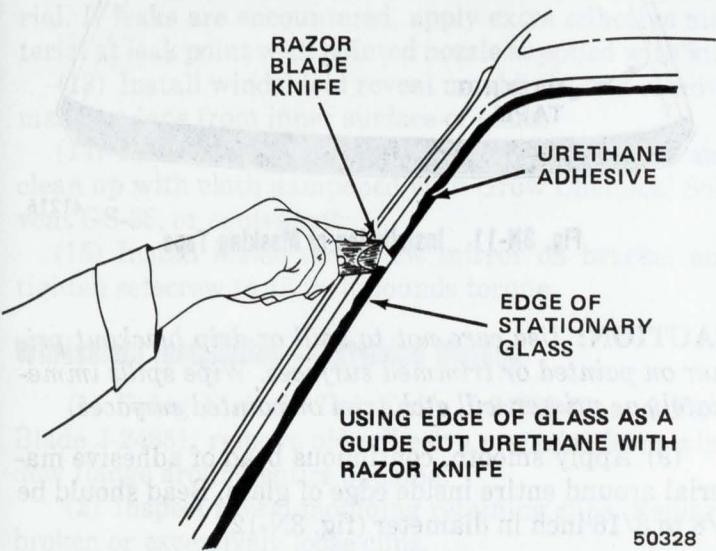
N-8 Cutting Urethane with Razor Blade Knife
